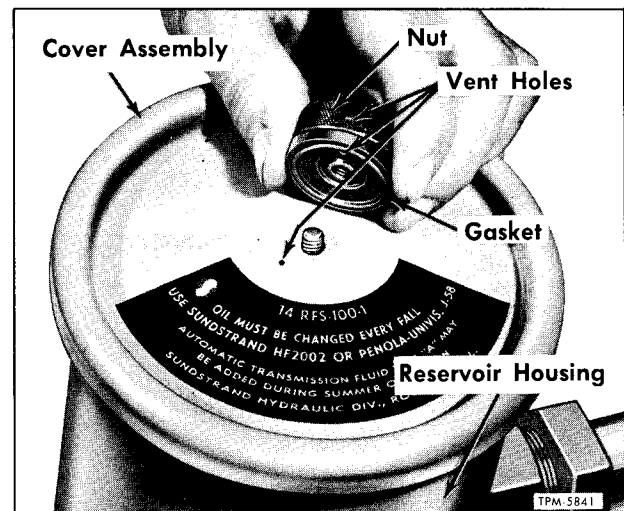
Vent Hole Locations In Reservoir Cover and Nut
